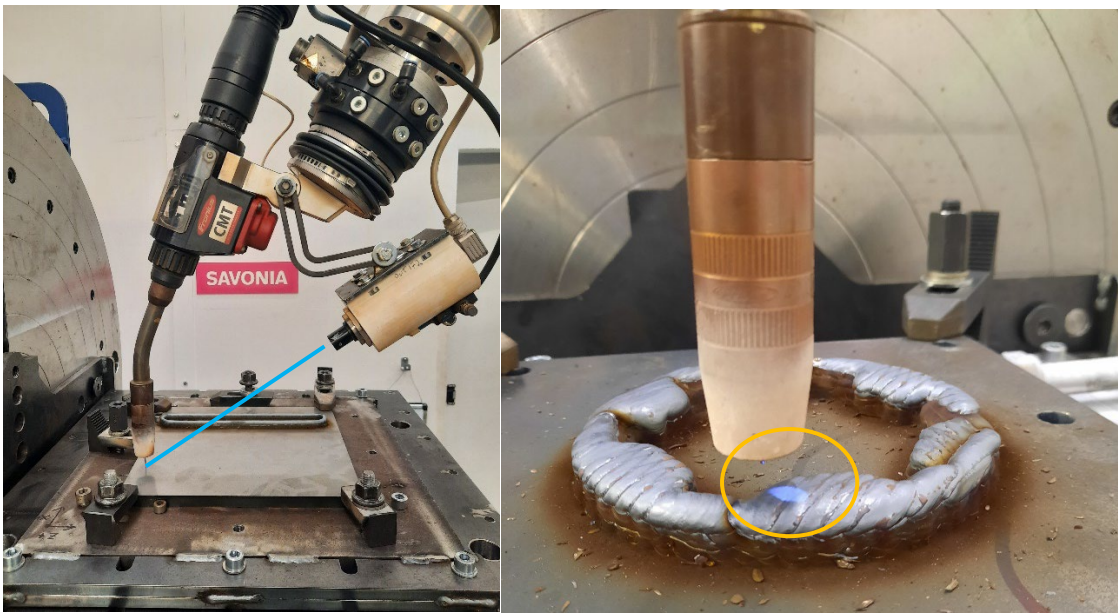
Tool setup with pyrometer and guide pointer of the pyrometer
